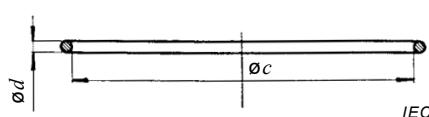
Flange type B: 60154 IEC-BR 84-320Figure 8 – Flange type B: 60154 IEC-BR 84-320 gasket
